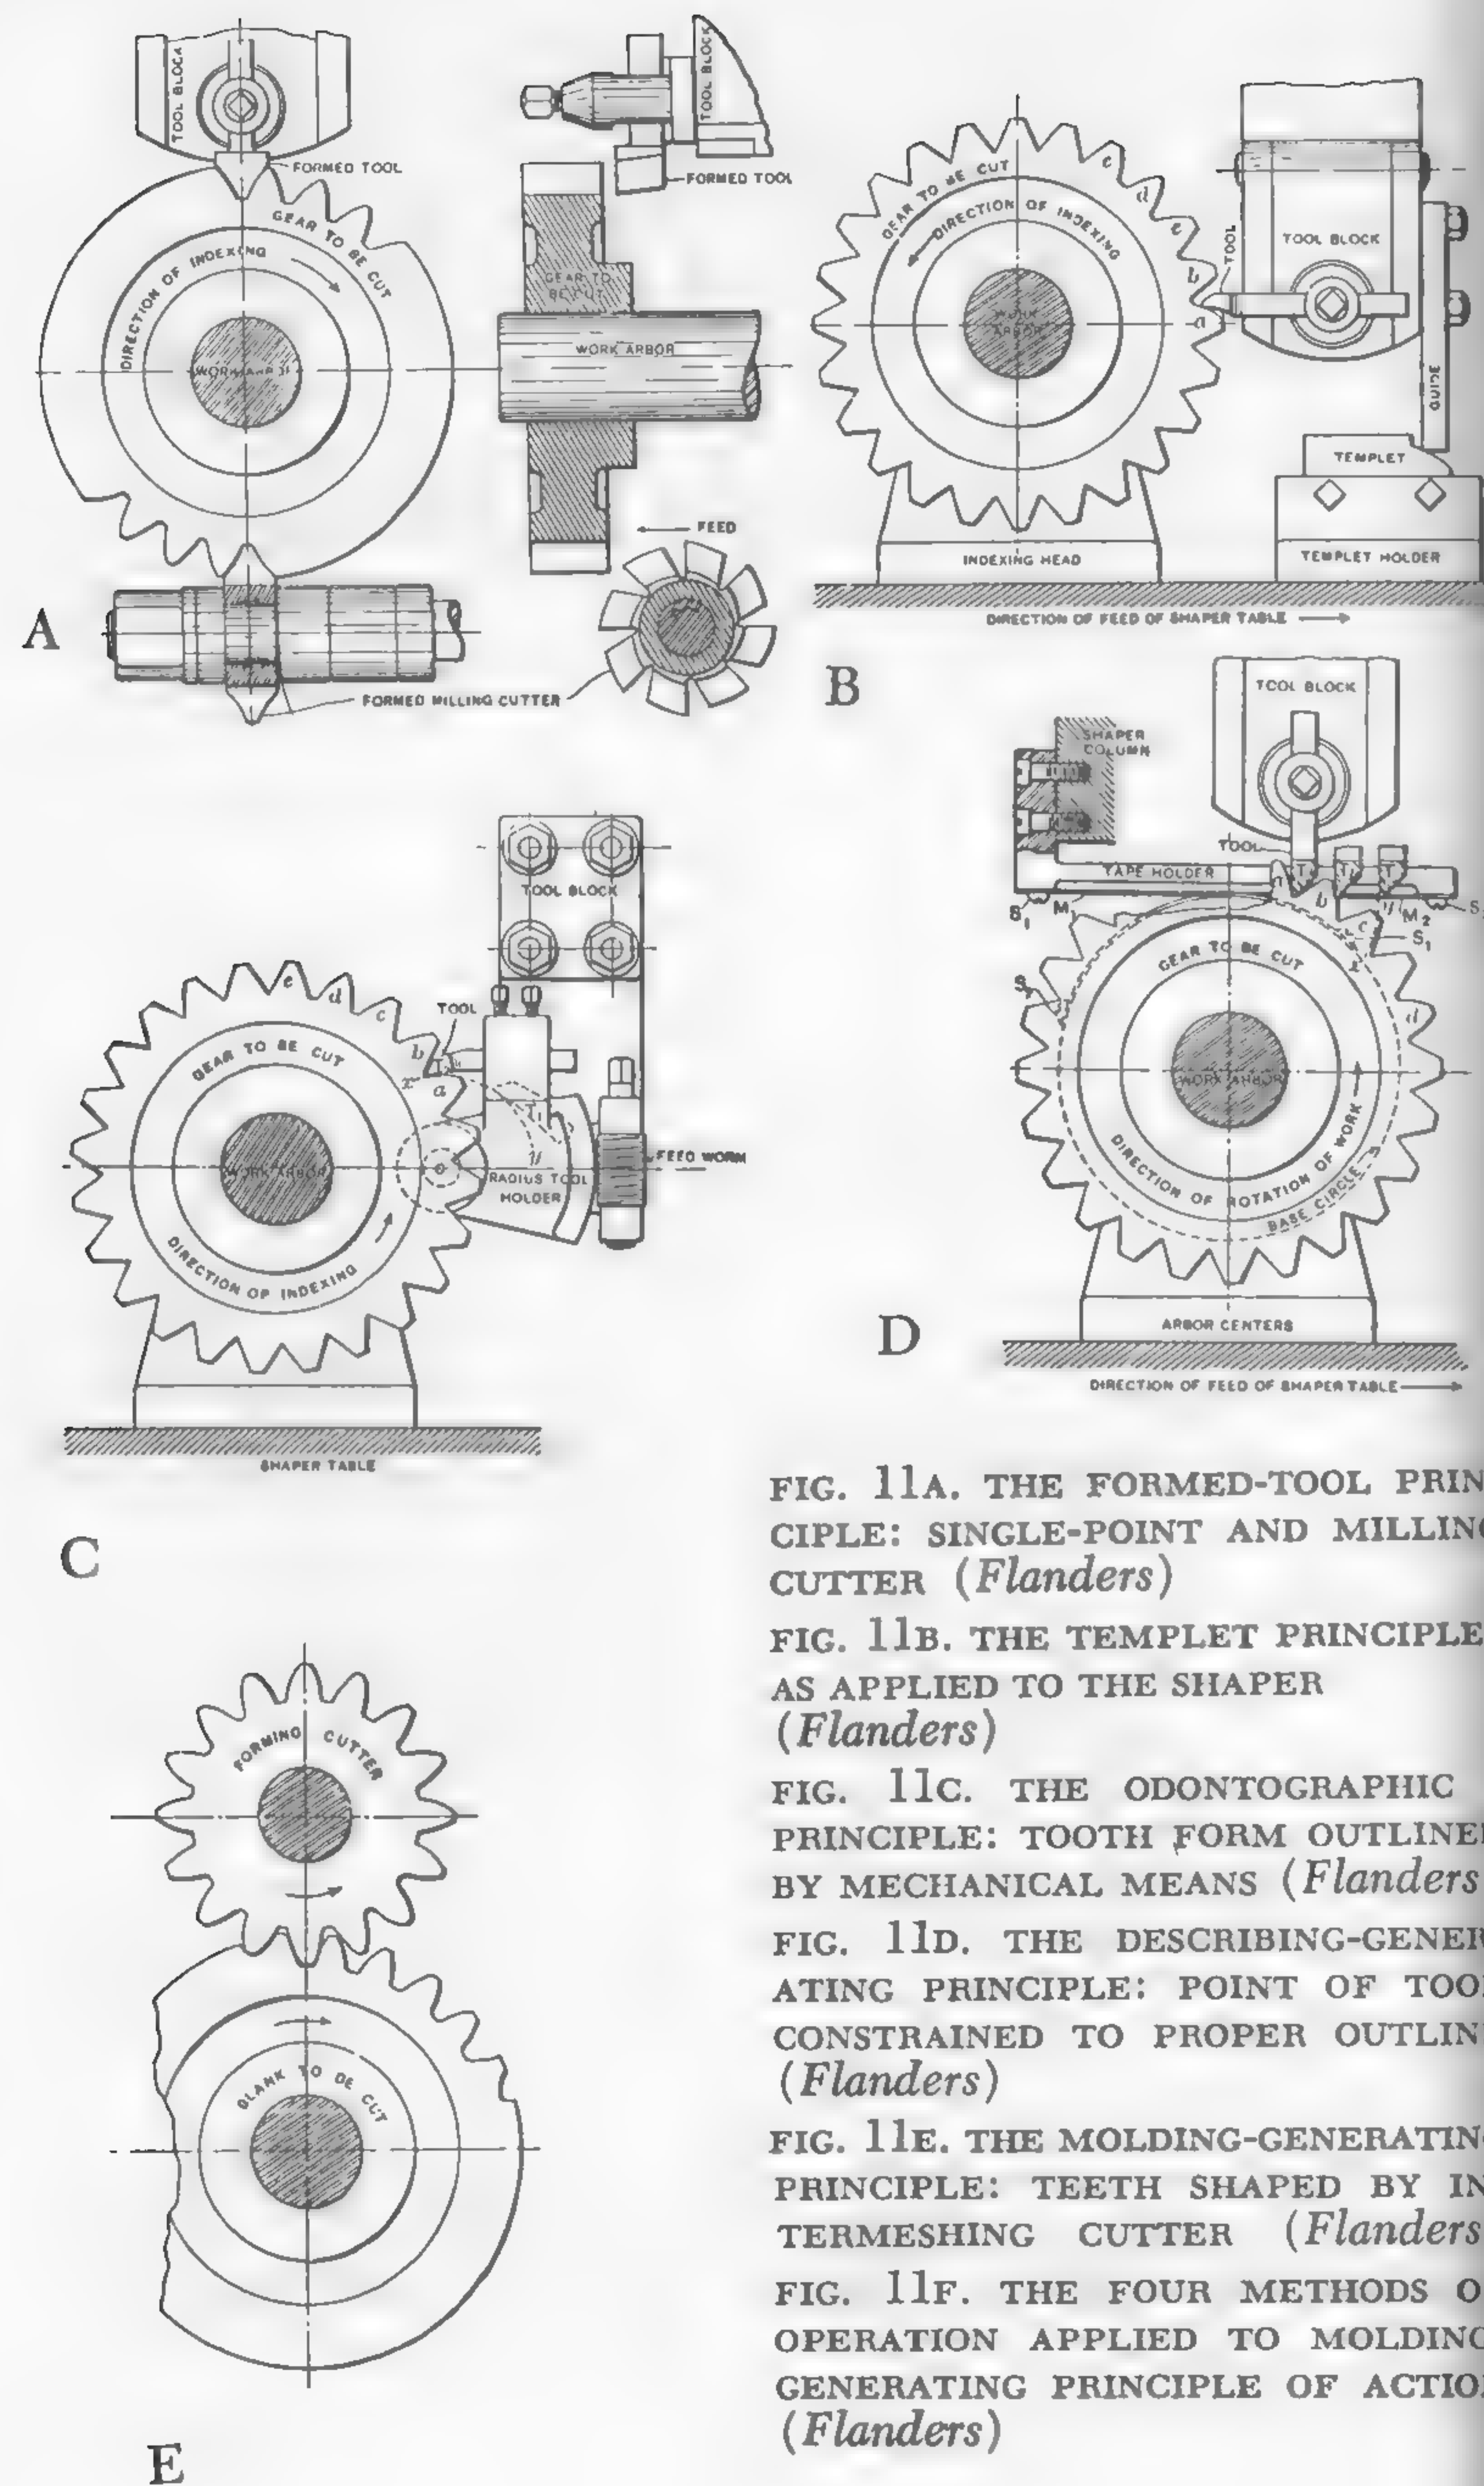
A. THE FORMED-TOOL PRINCIPLE: SINGLE-POINT AND MILLING CUTTER (Flanders)
